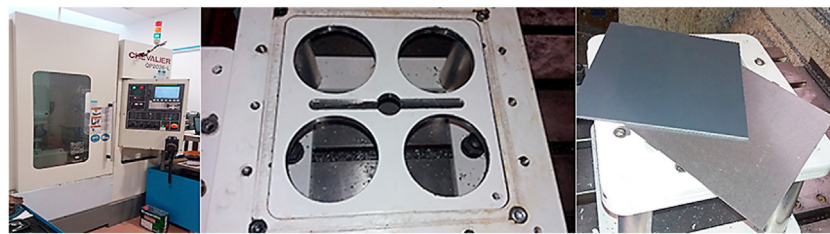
Machining center used to manufacture the molds (left); elevated frame and backing plate utilized to fix the sheets to the table of the machining center (center); PVC dummy and aluminized steel sheets employed as raw material to produce the molds (right).
